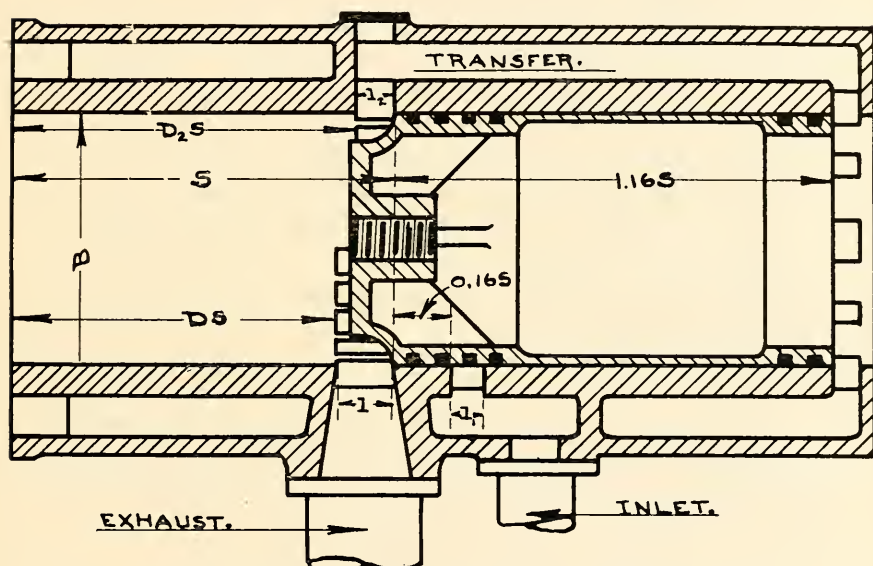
Section Thru a Cylinder of the Three-Port Engine.
